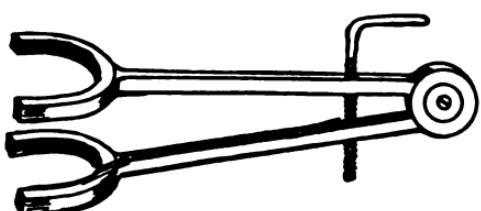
Type of Valve-Spring Tool Which Leaves the Hands Free
